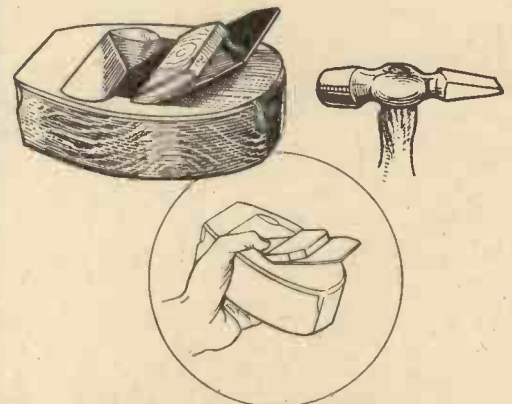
The iron of a smoothing plane is set back by striking the heel of the plane with a hammer or mallet.
